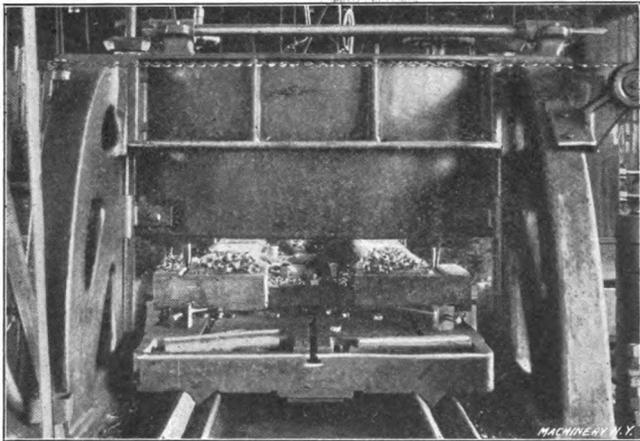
Rear View of Planer showing Four Tools at Work on One End of Two Main Rods
